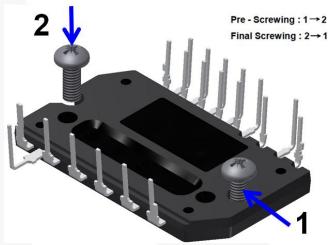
Mounting Screws Fastening Order: Pre-Screwing: 1 → 2; Final Screwing: 2 → 1
